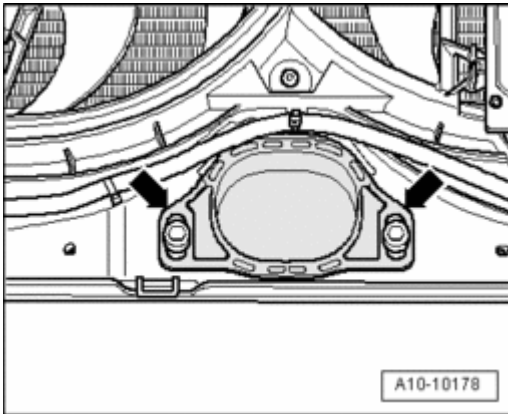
Placing Torque Support On Rubber Buffer For Torque Support And Tightening Bolts
